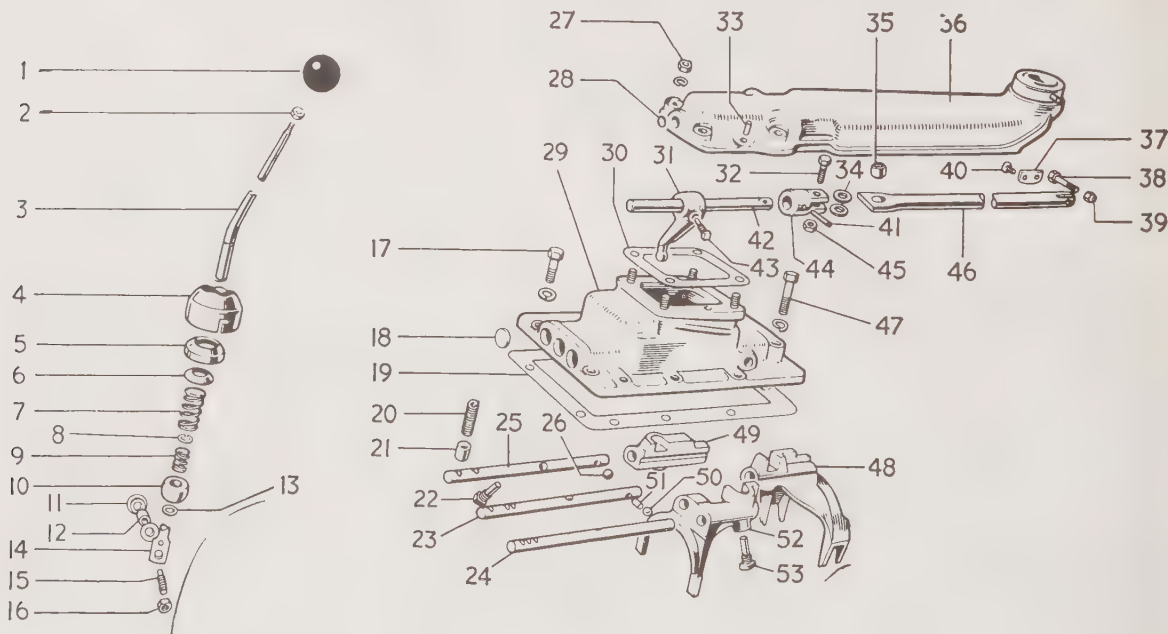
3 Gearbox top cover and selector mechanism. (For part numbers refer to Fig 6:2.)
